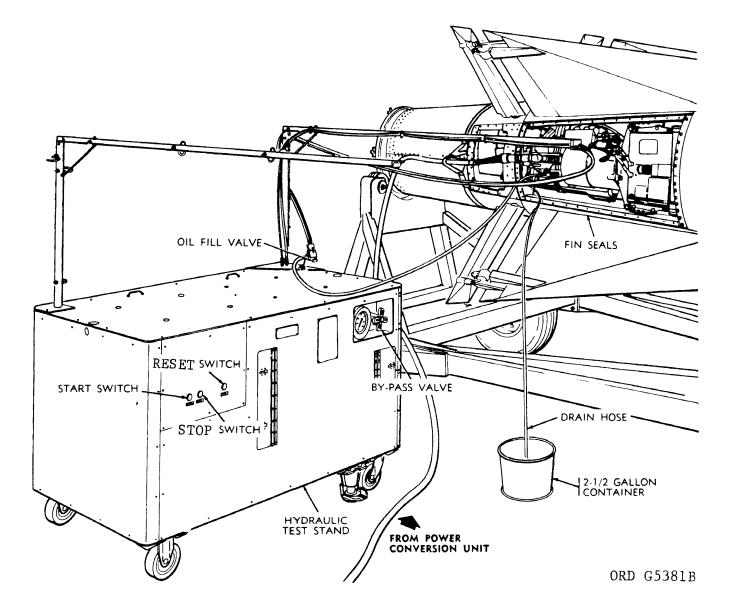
Oil fill and bleed, using the hydraulic test stand—typical.
